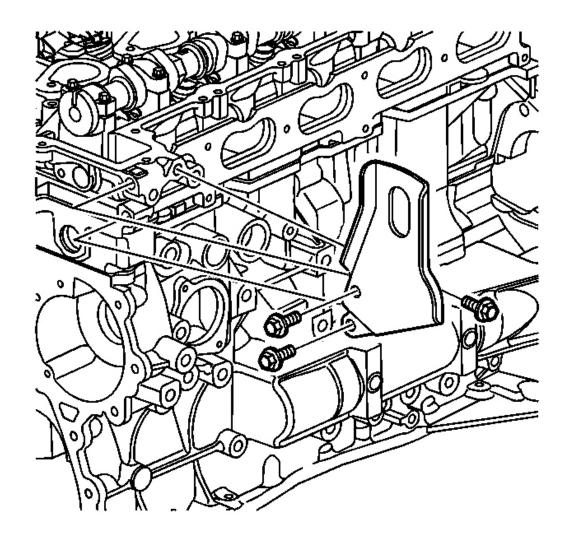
Removing Engine Lift Bracket Courtesy of GENERAL MOTORS CORP.
